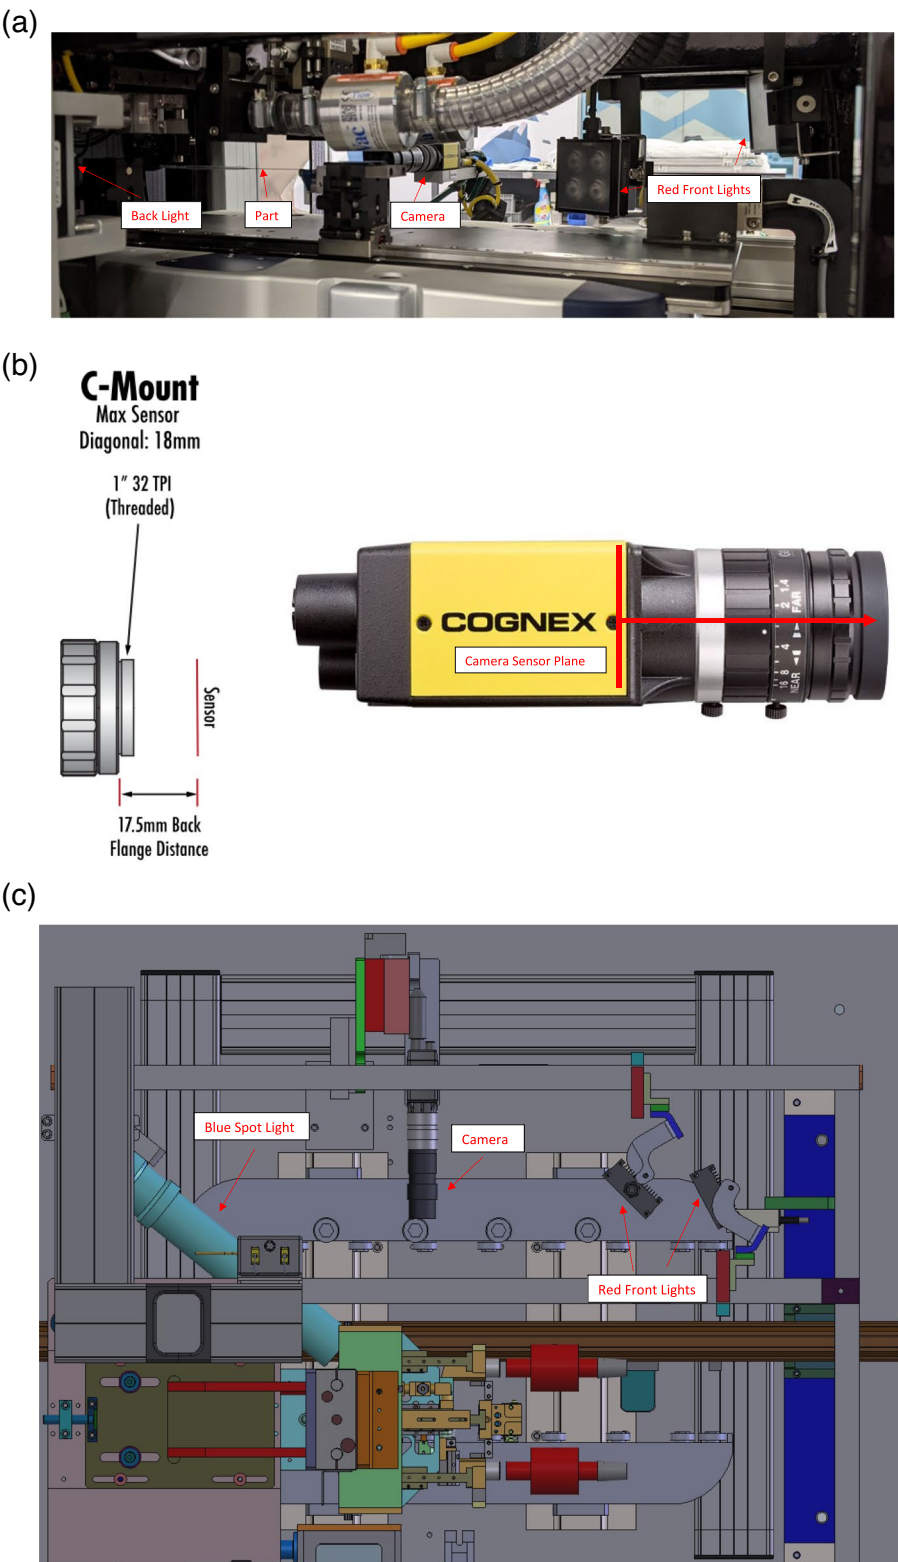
a Test cell. b Camera and lens assembly. c Cell design layout
